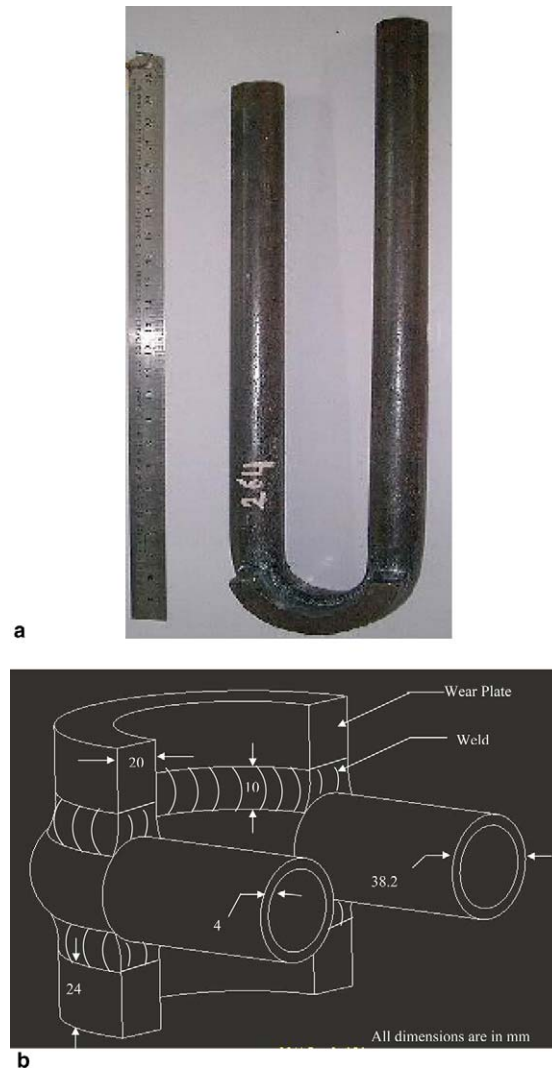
Section of the evaporator tube showing the wear plate welded at the bend.
